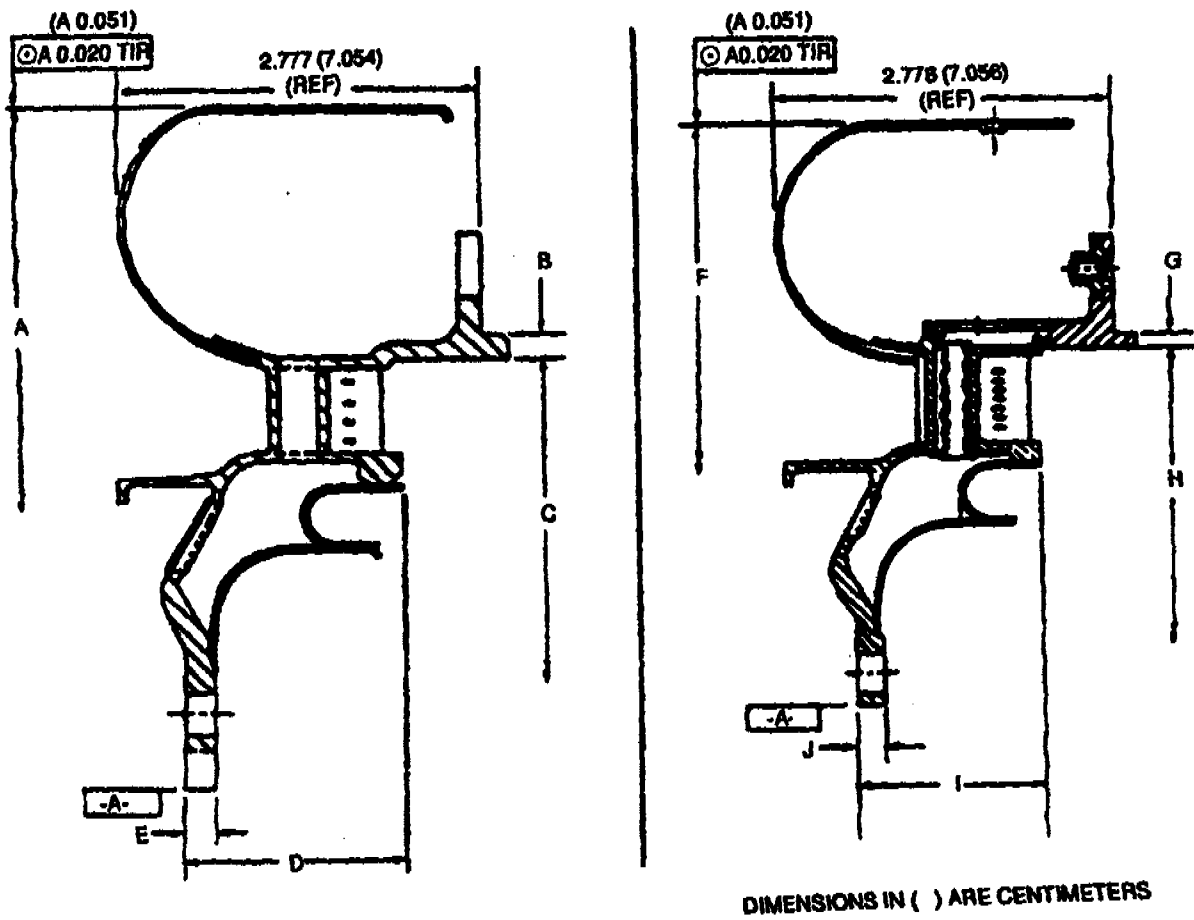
First Stage Gas Producer Nozzle Assembly Dimensional Inspection Locations.
